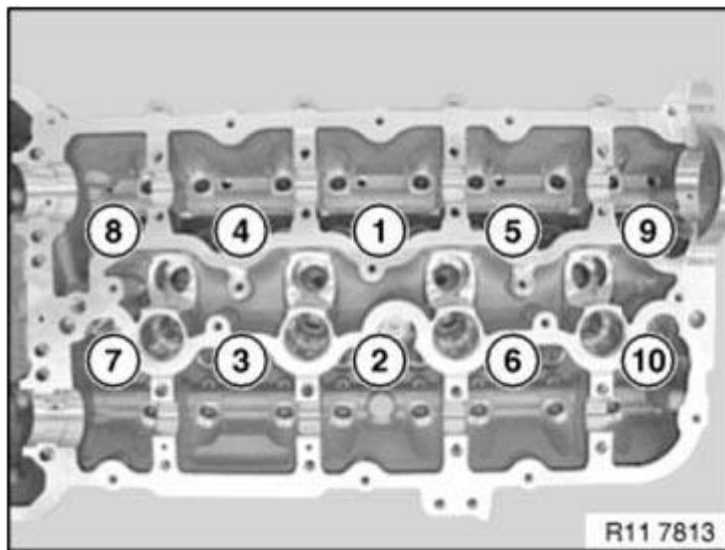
Identifying Special Tool 11 8 083 Tightening Sequence
